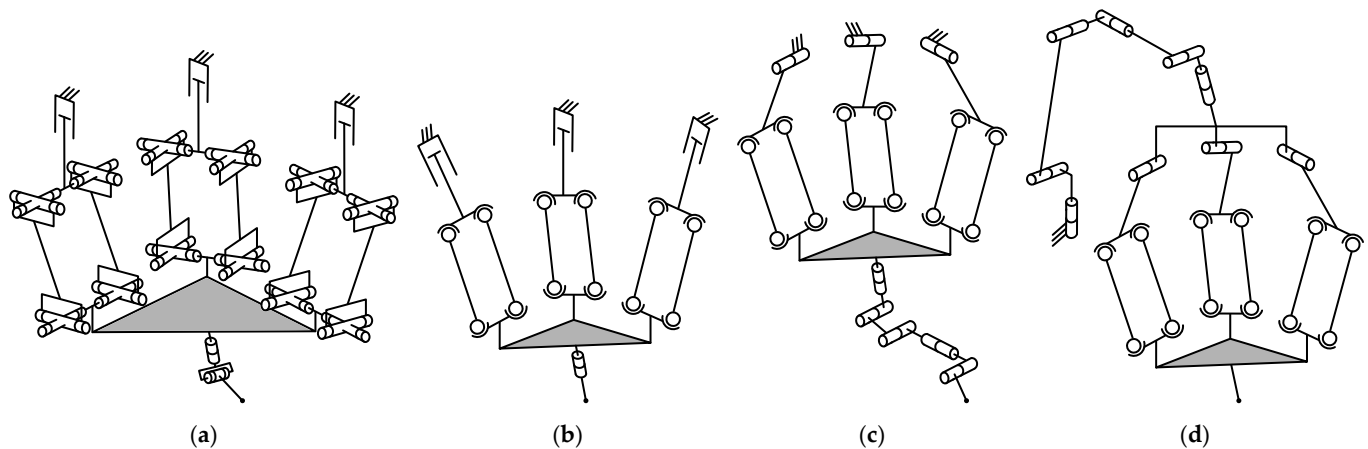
Parallel–serial machining manipulators based on the Delta parallel mechanism: (a) (3-PRPaR)RR (JDYP51) [242]; (b) (3-PPa*)R [245]; (c) (3-RPa*)RRRRR [253]; (d) RRRRRR(3-RPa*) [254].
